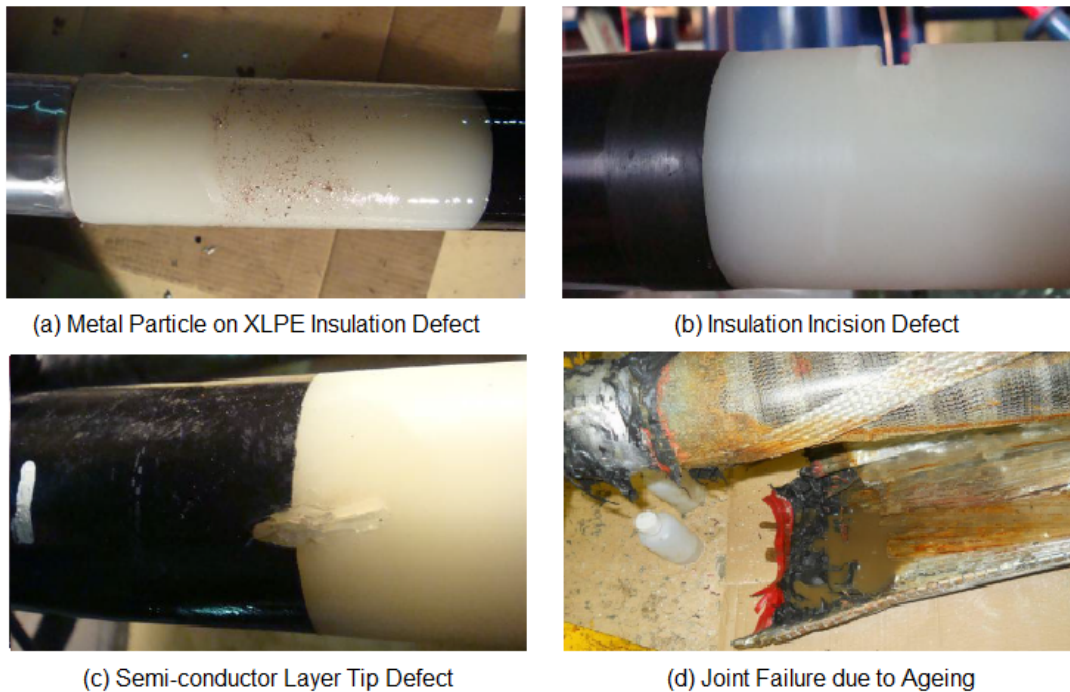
Typical Defects and Failure Mechanisms in Cable Joints [7], [8] © 2010, 2012 IEEE.
